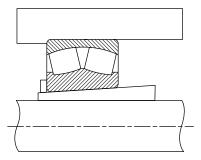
Spherical roller bearing mounted with an adapter sleeve.
